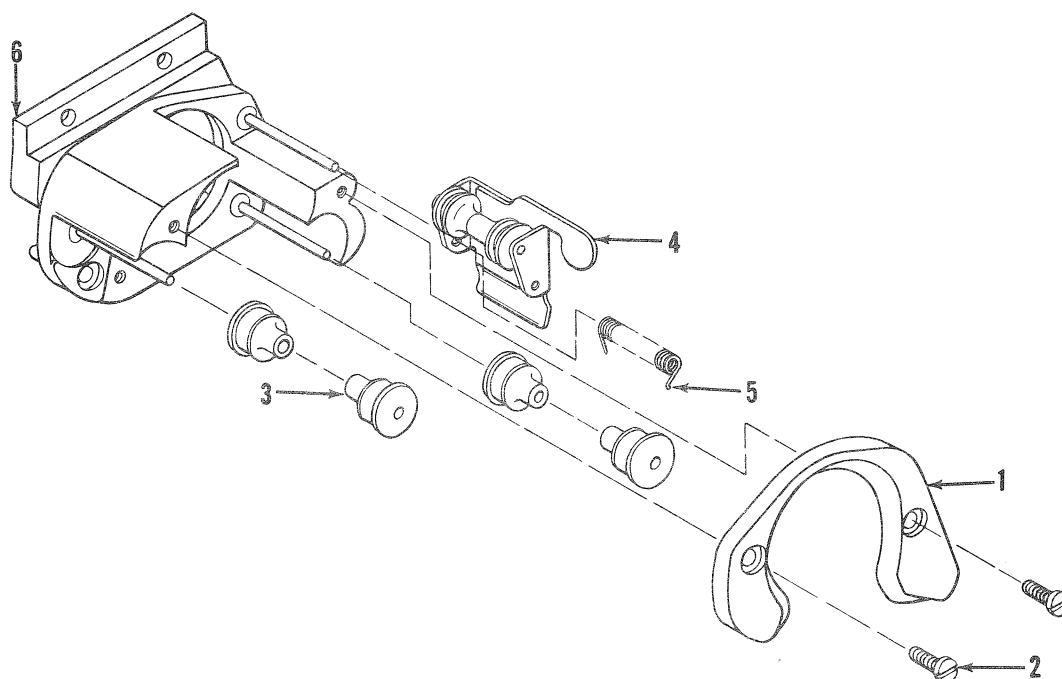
SHOE ASSEMBLY - FEED SPROCKET
